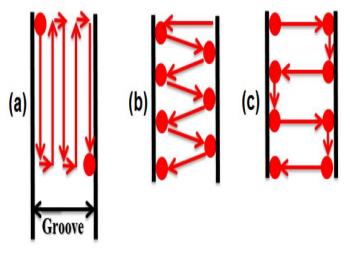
The three forms of welding that use to weld the pipe.
